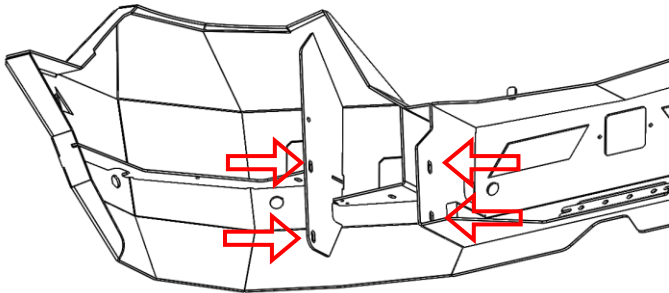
Mounting Locations, Aluminum to Steel Winch Tray (Repeat for Other Side)
